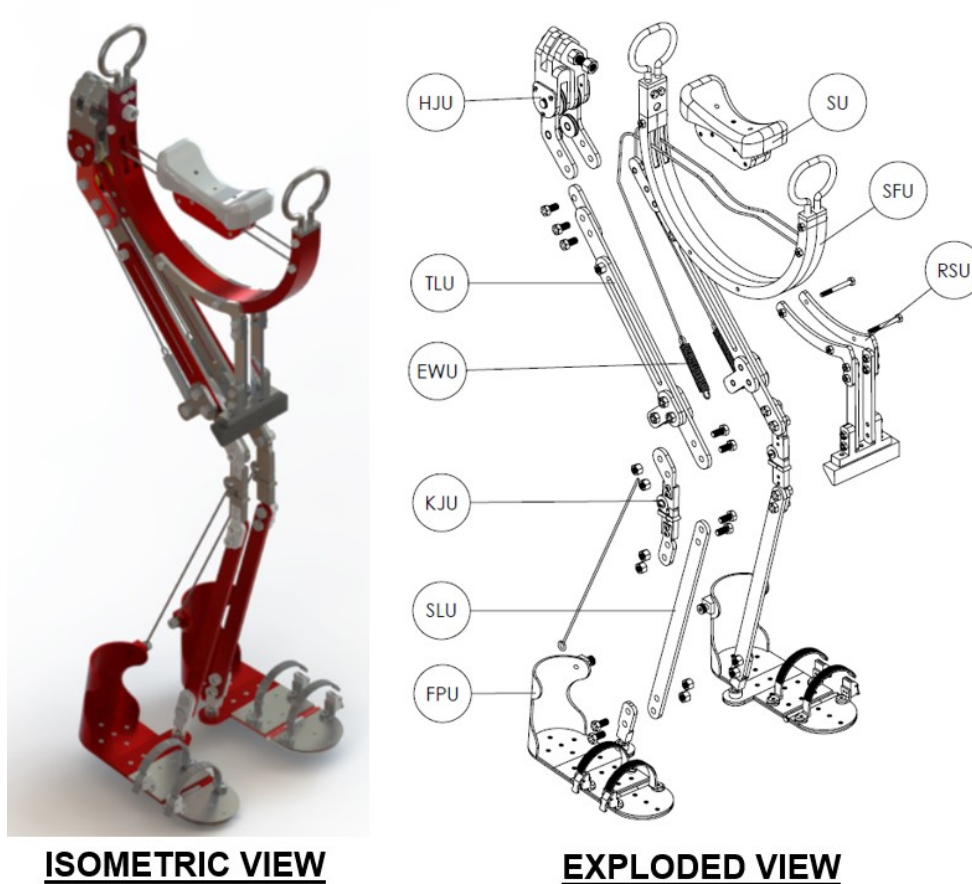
Isometric view (left) and exploded view (right) of CAD model of proposed passive WAE.
